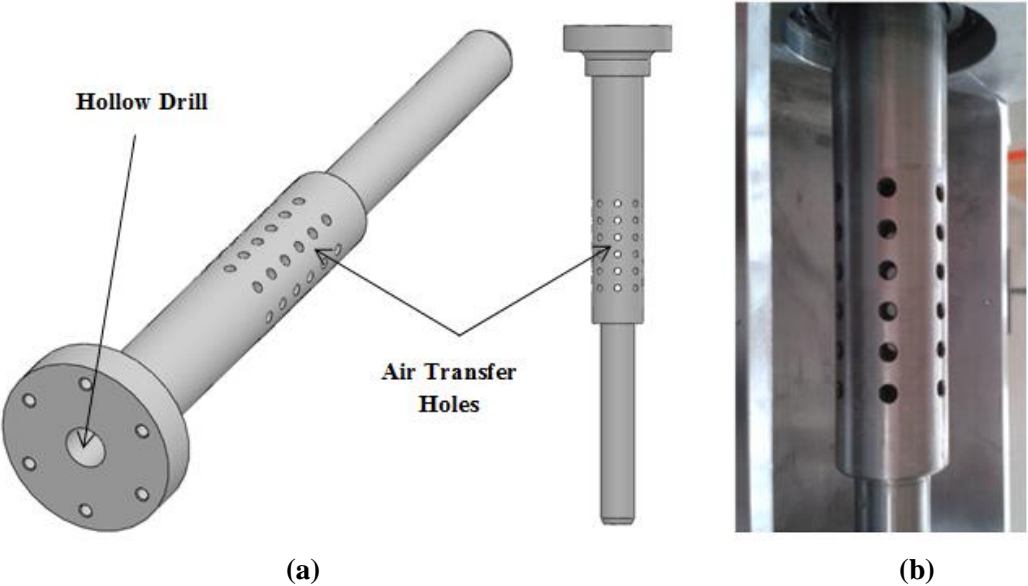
(a) Rendered CAD of the hollow shaft, (b) hollow shaft after production
